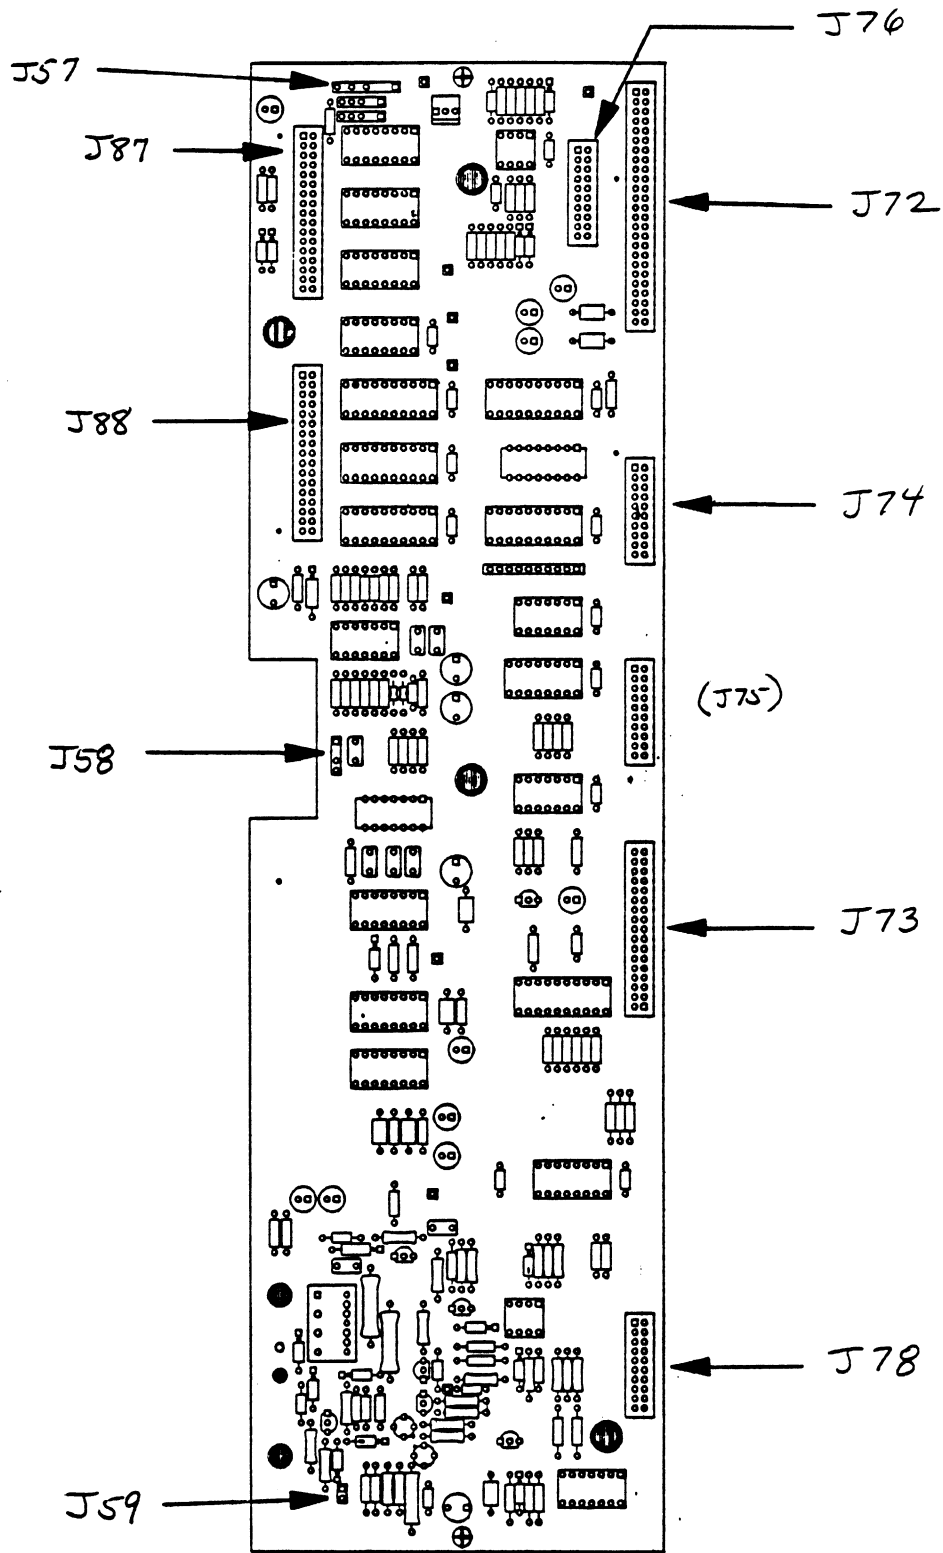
Connector locations for removal of the A10 Front Panel Interface Board.
